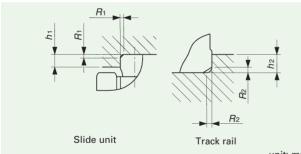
Relieved fillet at the corner of reference mounting surfaces
